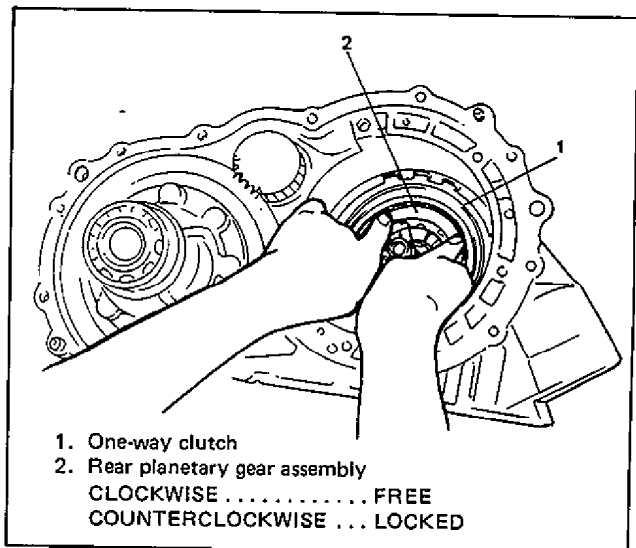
B-199 Checking Rear Planetary Gear Rotation
